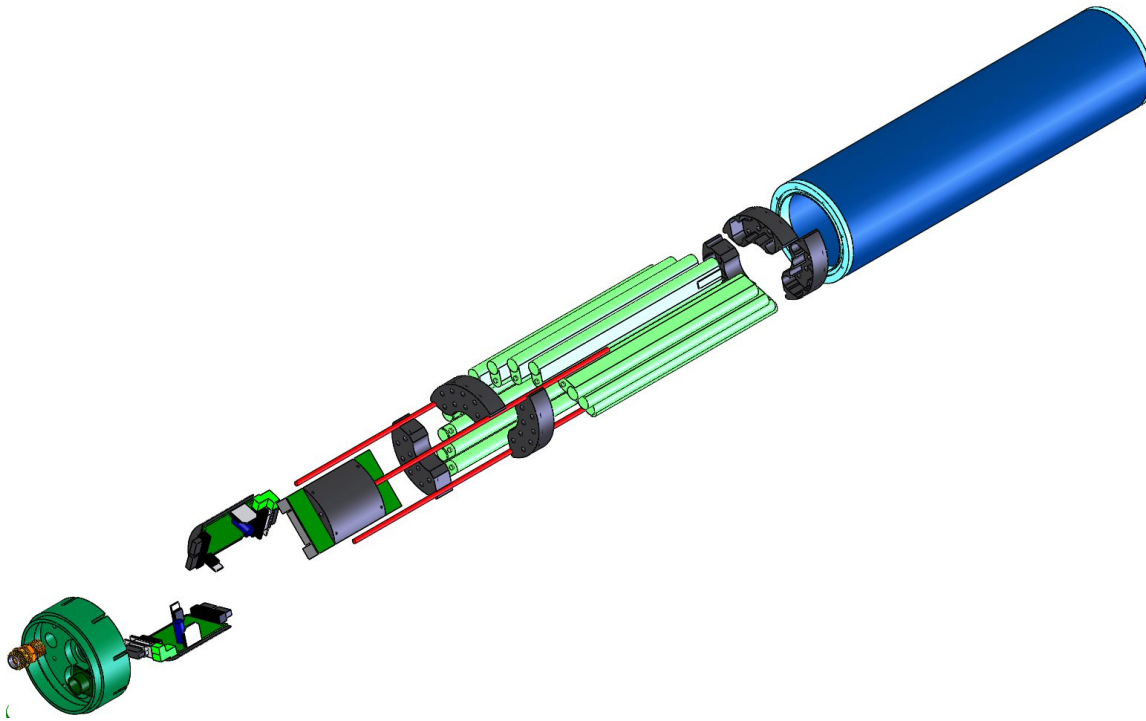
Exploded view of one of Helix's drive cylinders shown battery and electronic packaging.
